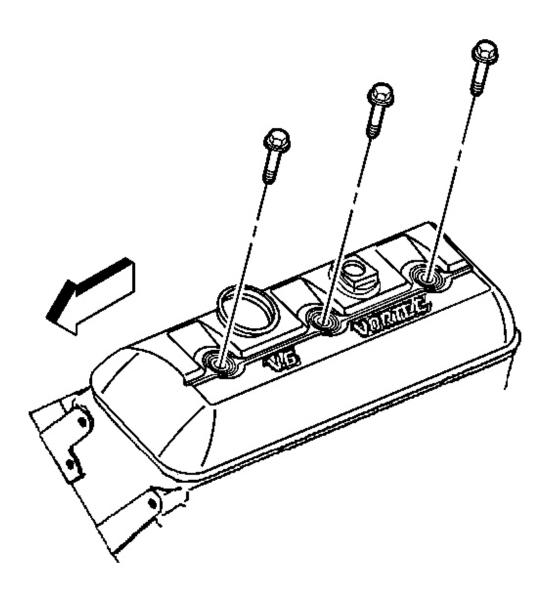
Valve Rocker Arm Cover Bolts (Left)
